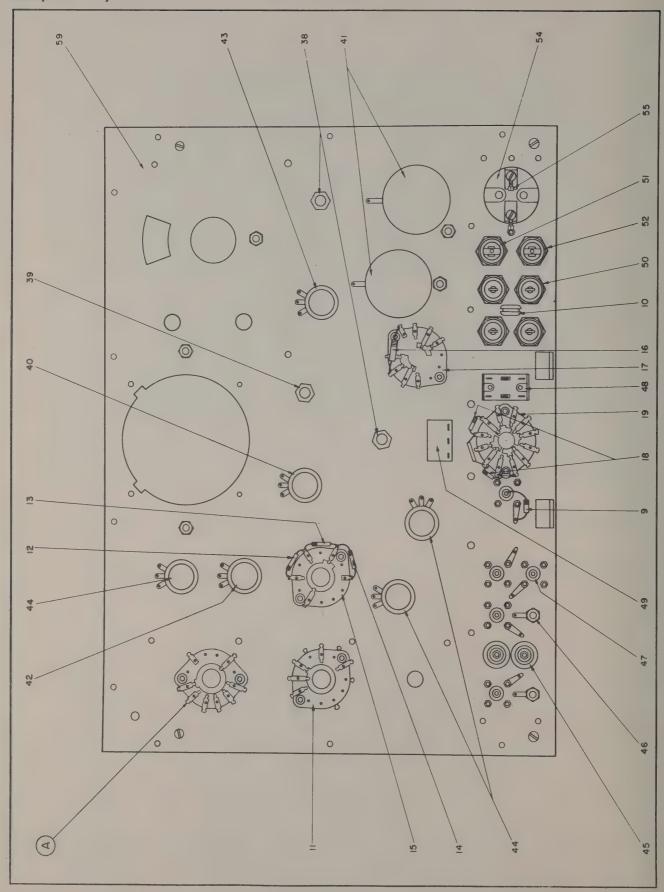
Control Panel Assembly (Sheet 2 of 2)
